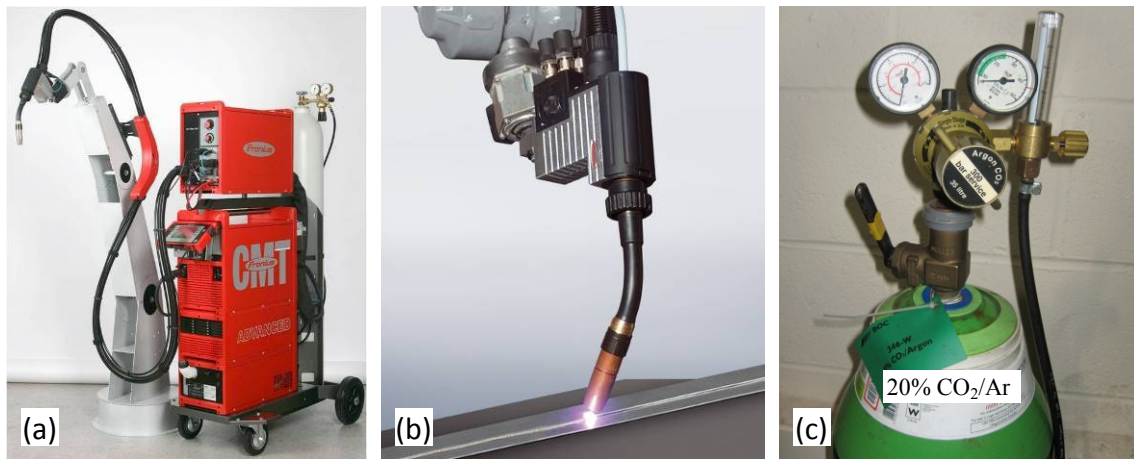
Cold metal transfer welding set used for the preliminary single layer deposition studies (a) welding power source, (b) *Robacta Drive* welding torch, (c) shielding gas mixture Ar/CO₂ (20%); photographs courtesy of Fronius International GmbH.
